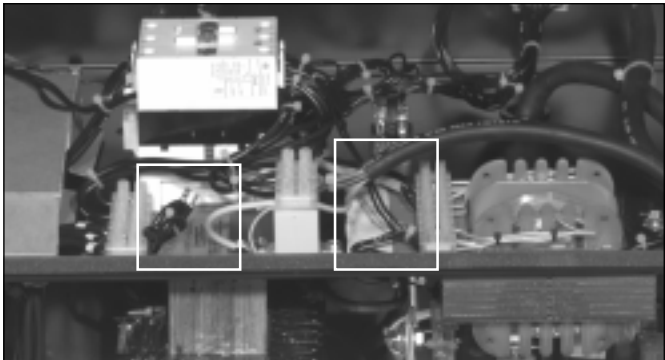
Terminal boards for welding transformer and auxiliary transformer
